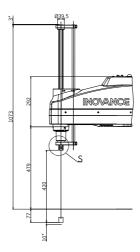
Dimension drawing of upper and lower limit positions of J3 axis of IR-GS20
